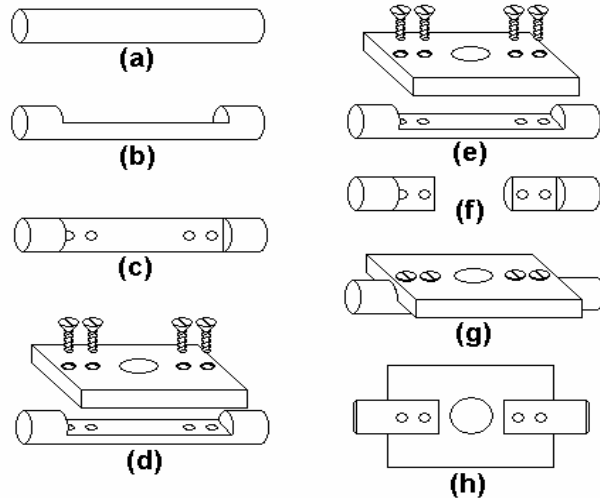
( a= shaft, b= groove making, c= drilling and threading, d=fixing of the WEB-Cam plate, e=dismantling, f=cutting into two halves, g=reassembling, h=actual configuration )
